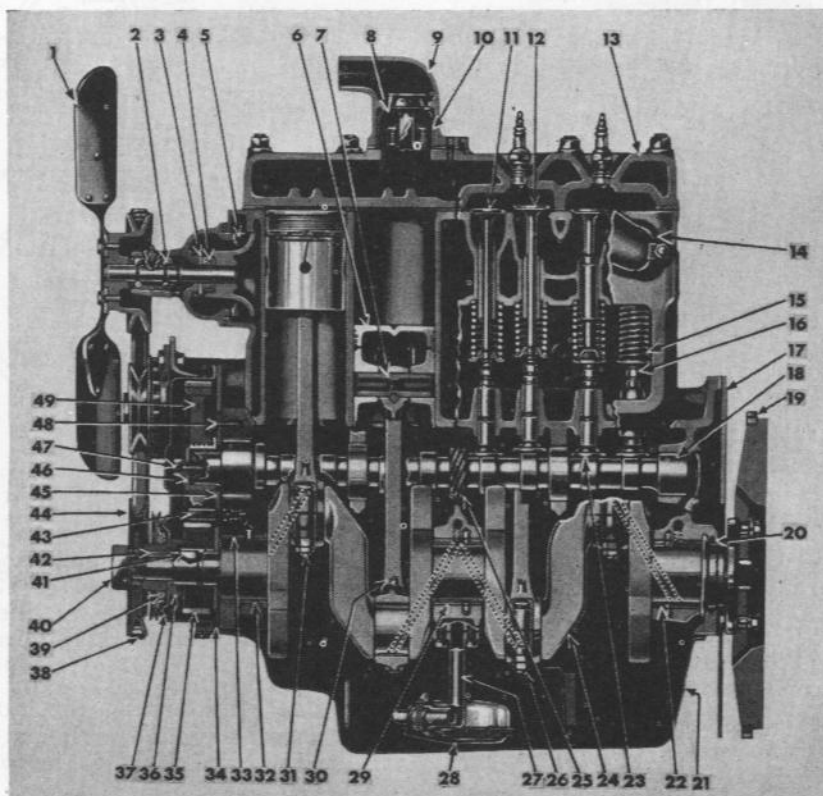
FOUR CYLINDER L-HEAD ENGINE—SIDE VIEW
